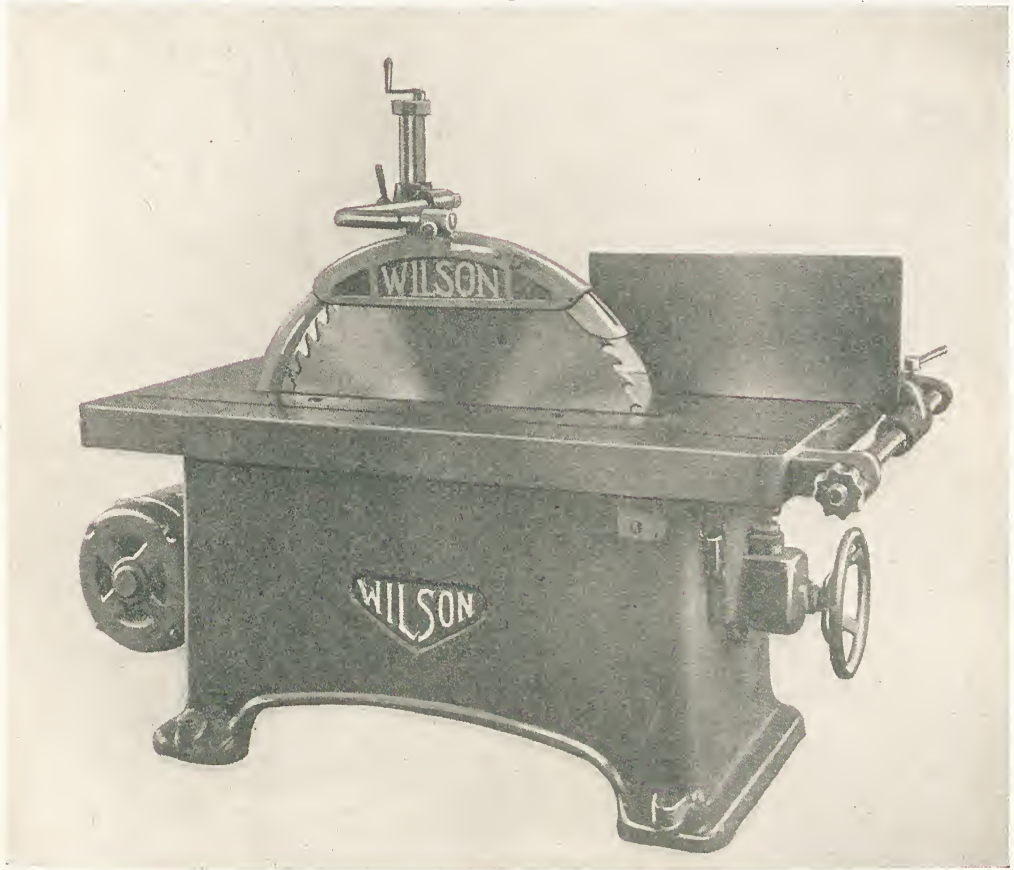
Motorised circular saw bench made in four sizes, *i.e.* taking saws up to 26 inches, 32 inches, 36 inches, 42 inches diameter. (Courtesy of Wilson Bros. [Leeds], Ltd.)
